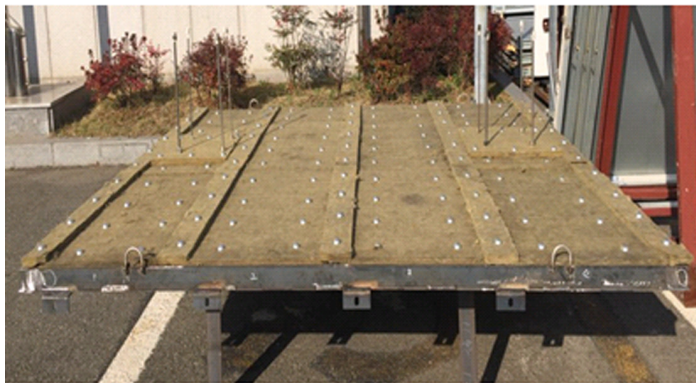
Fire test specimen design for A60 class bulkhead penetration piece with mechanical fastener type insulation (Park et al., 2018)
